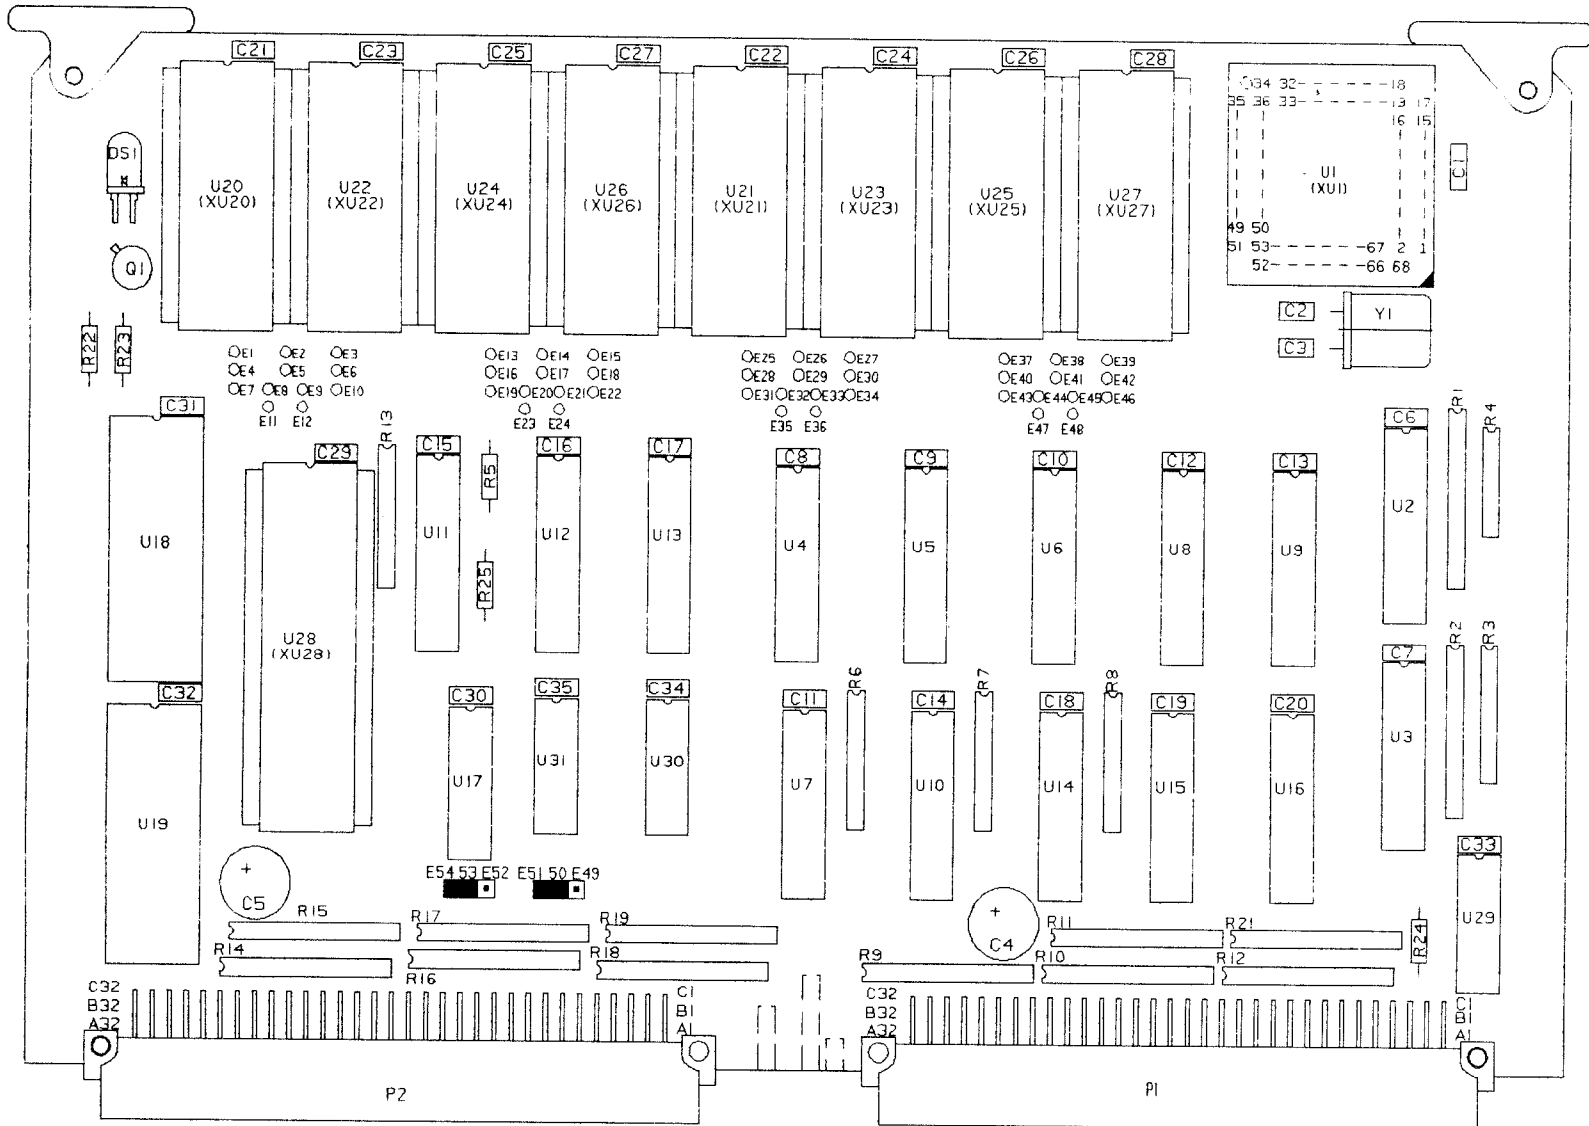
MOD/DEMOD A4 and FEC I/O A6 PWB Assembly Component Locations (10133-2400-01/02, Rev. G)
